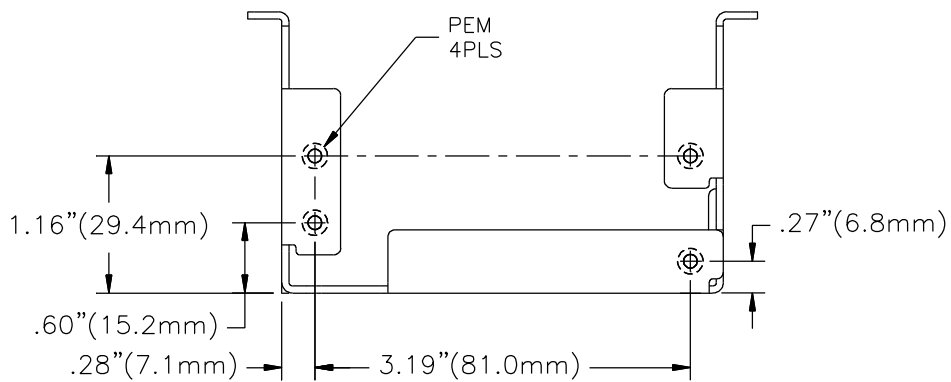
Ticket Supply Box to Main Chassis Mounting Points
